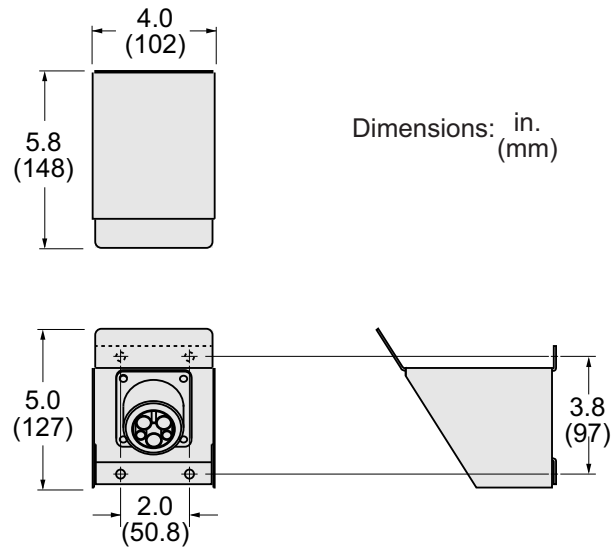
Wall-Mount Cable Bracket with Connector Dock
